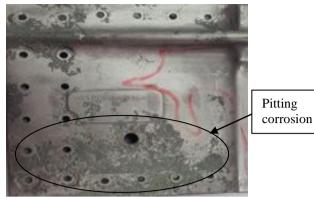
Fitting sponson spar; pitting corrosion, before CS treatment
